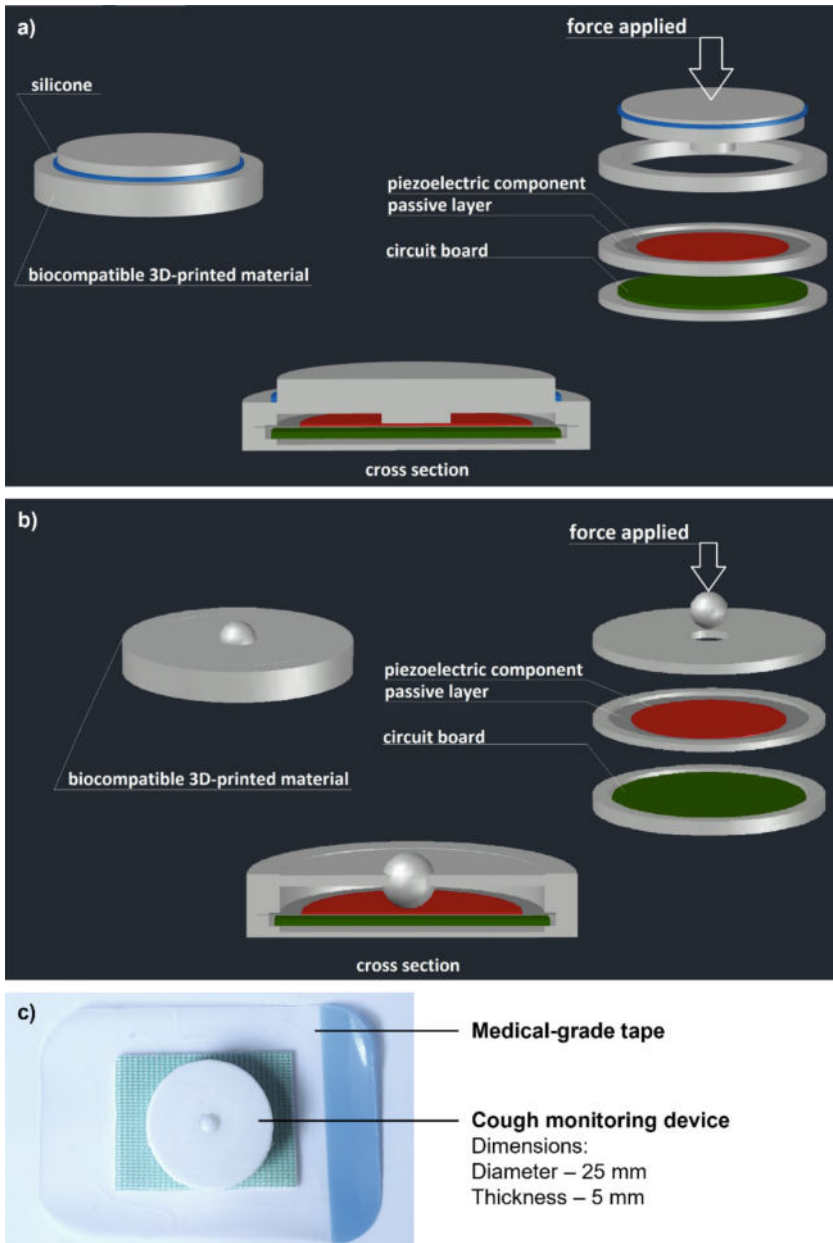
Schematics of two examples for device structures and packaging: a) piston-type and b) ball-induced sensor element; c) Photo of a fabricated device placed on a medical-grade tape.
